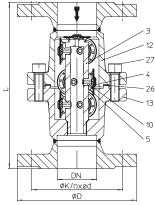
1....10K2 (DN40-50) with 10 capsules - In-line design, with flanges
